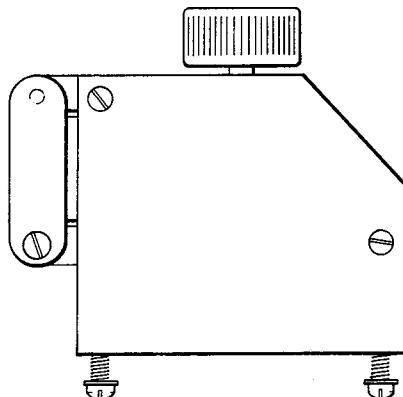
Backshell 90 deg. opening (recessed jackscrew)
